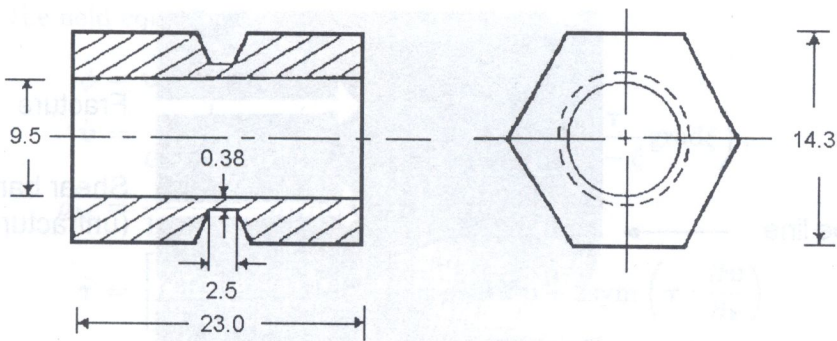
Details of specimen with hexagonal mounting flanges used in the torsional Kolsky bar experiment (all dimensions are in millimeters), cf. HARTLEY, DUFFY AND HAWLEY (1987), [4].
